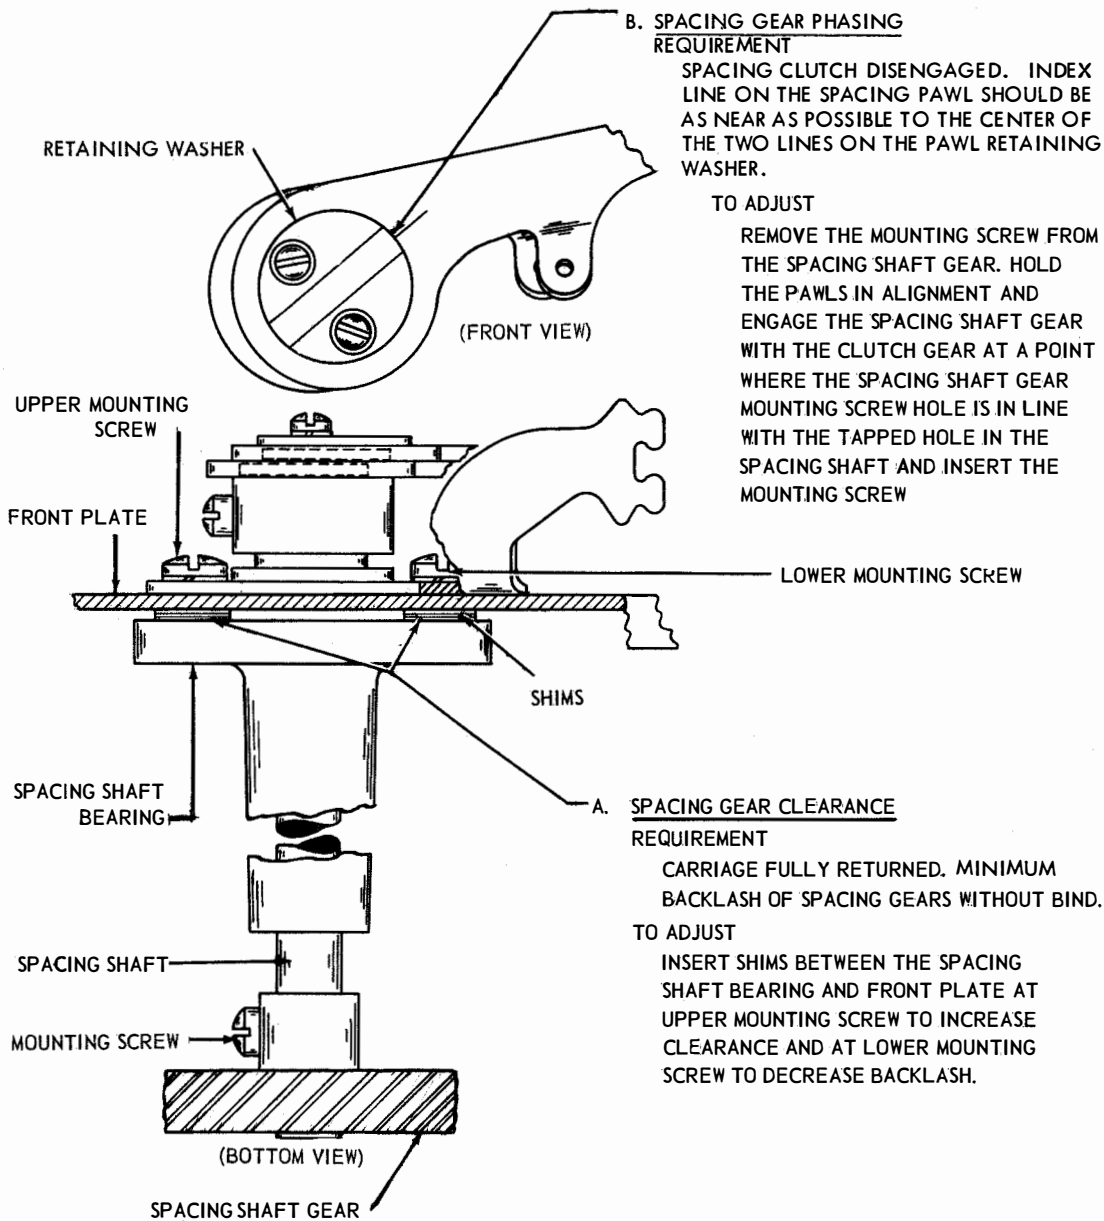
TYPING UNIT, SPACING MECHANISM
